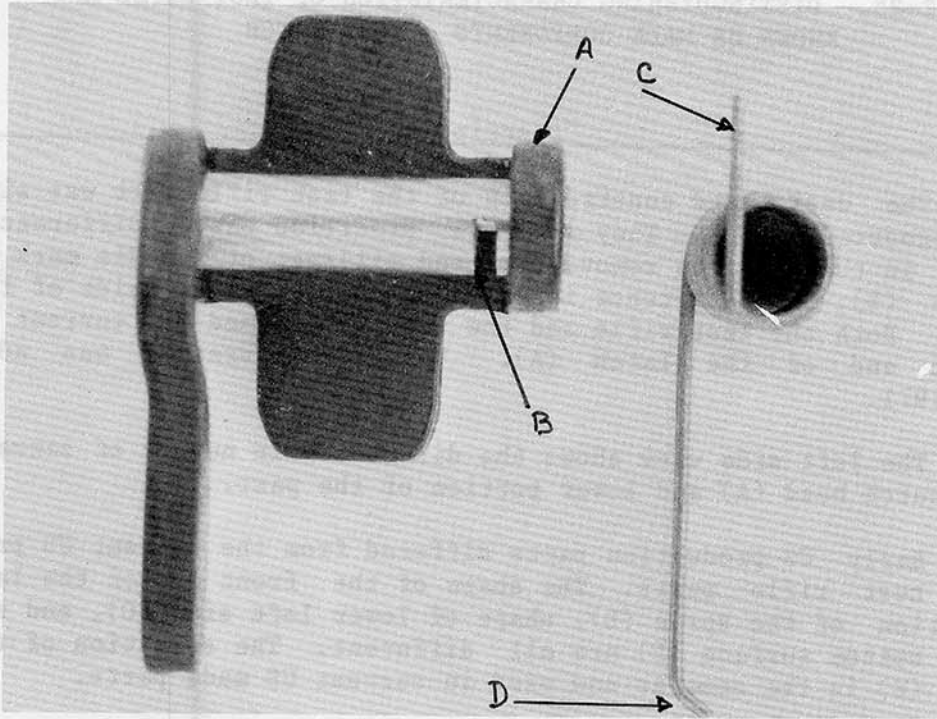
US supply automatic sear assembly partially disassembled (packaging marked A-1-69-BK4).
